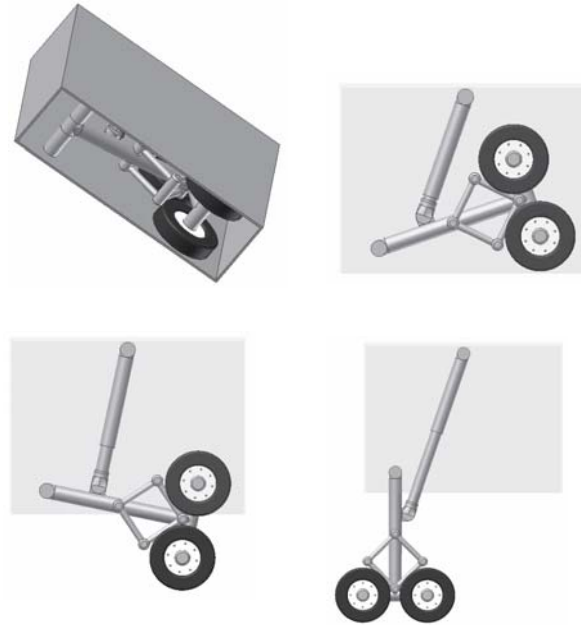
Rear Landing Gear Configuration (4 wheels)
